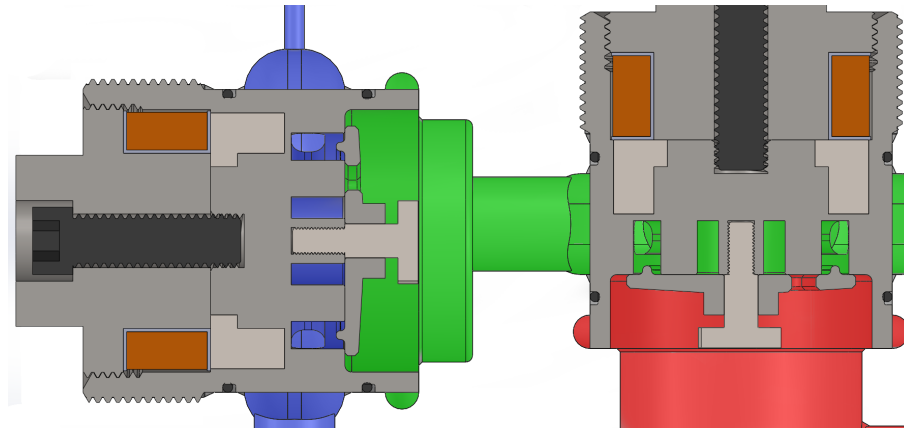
Manifold with the blue region being the LP oil, green region is manifold oil, and red is HP oil.
